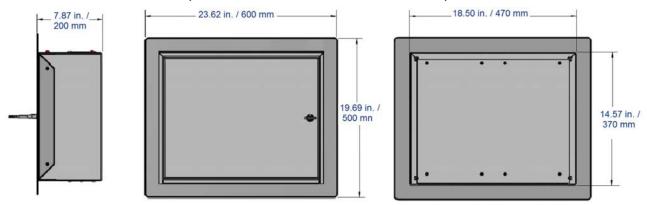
SINGLE SK Enclosure Overall Dimensions with Decorative Trim Frame
